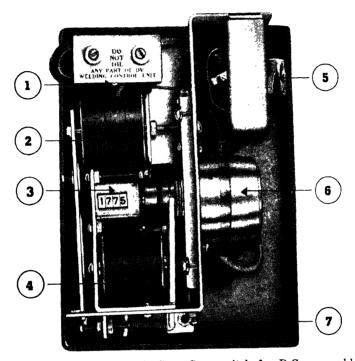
The D-V Automatic Start-Stop switch for D.C. arc welders, 1. Stop switch, 2. D.C. magnet coil, 3. Arc-time register, 4. A.C. magnet coil, 5. transformer, 6. motor, 7. time adjustment
